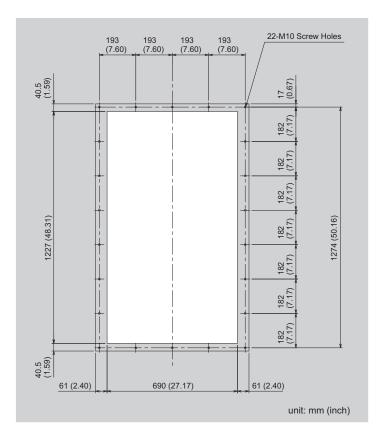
Panel Cut-Out Dimensions (CIMR-A□4T0515U, 0675U)
